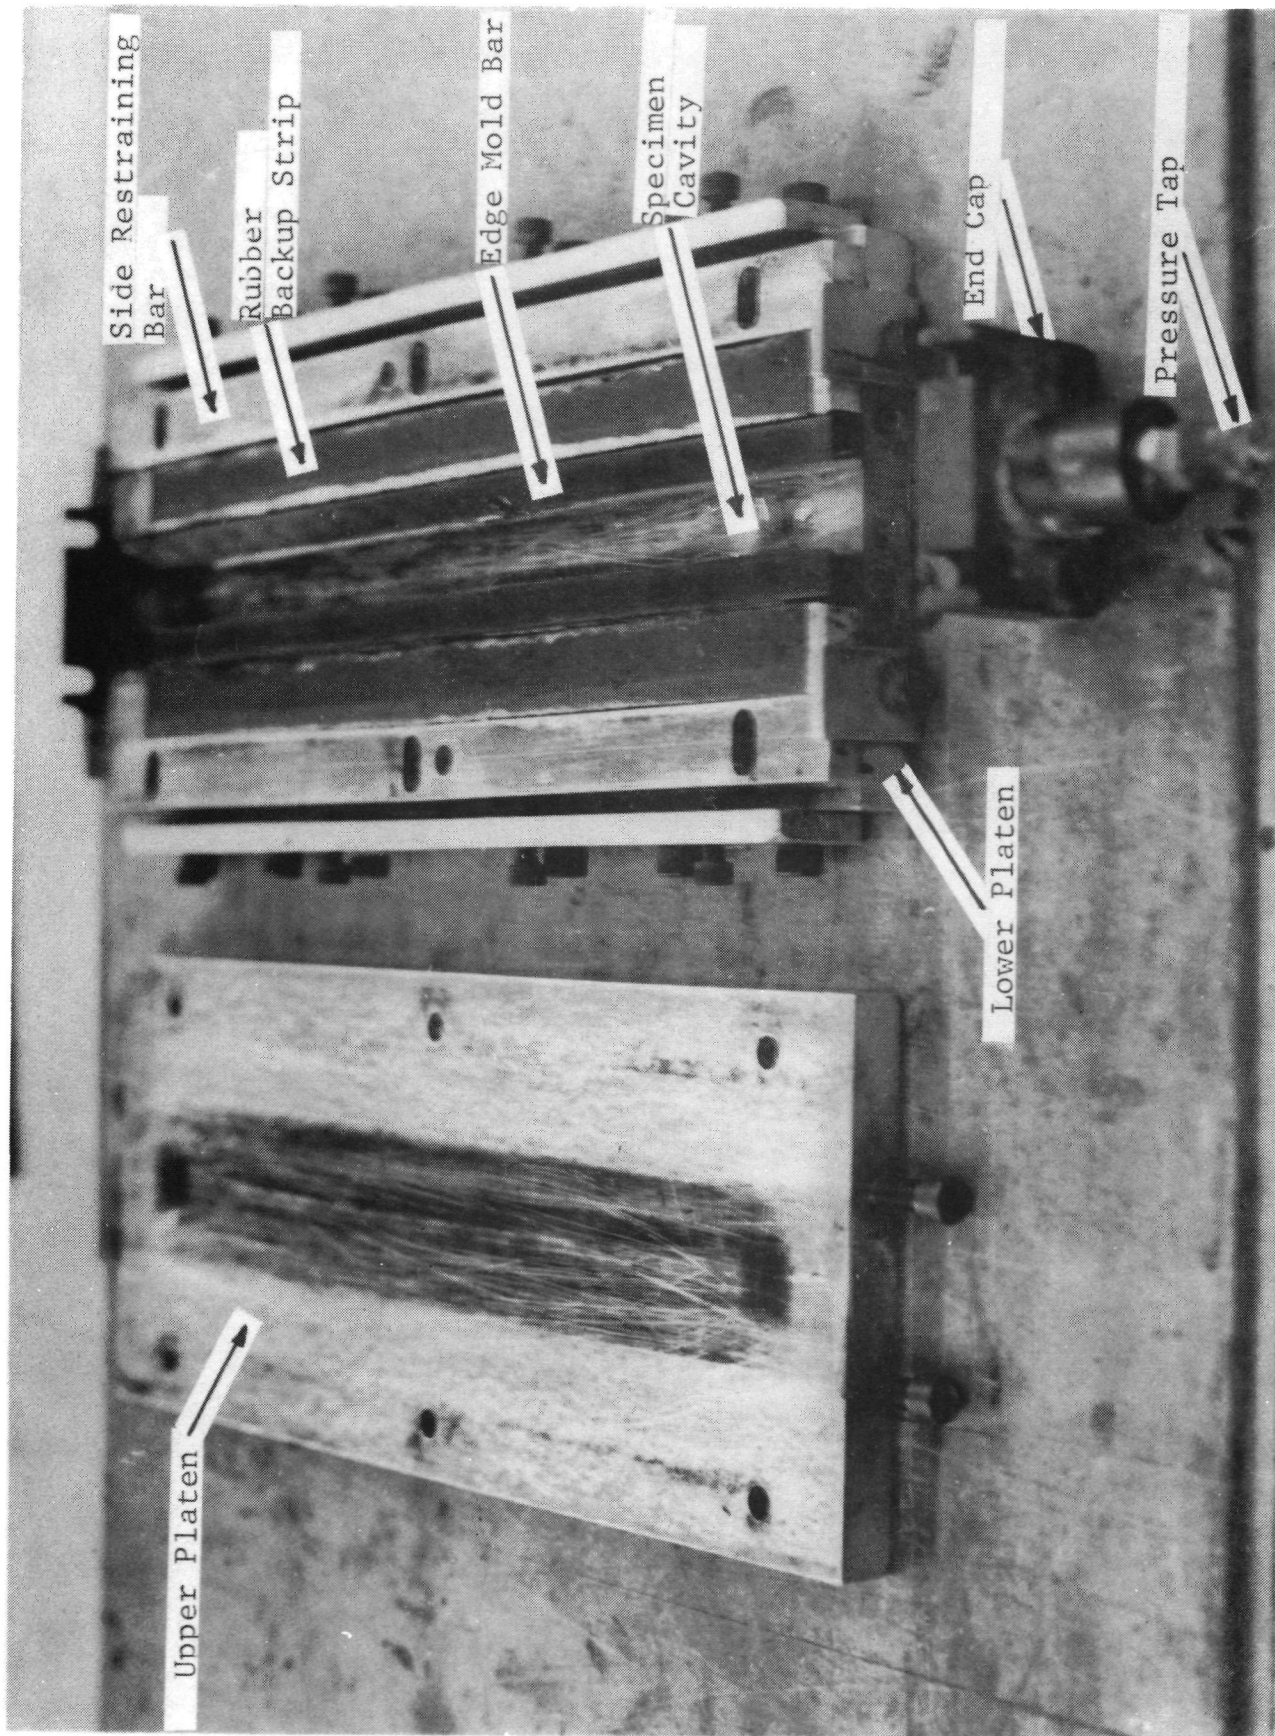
Open View of Flattened Tube Specimen Molding Tool
